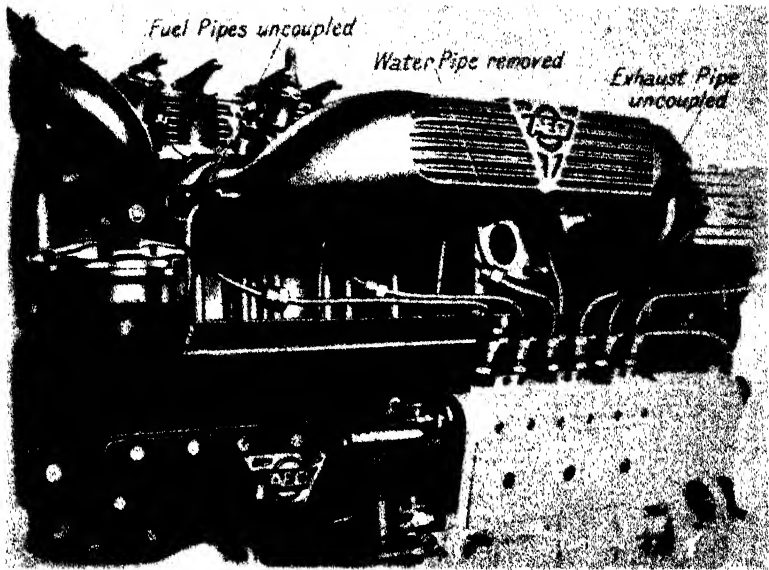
Illustrating method of dismantling Cylinder Components.
